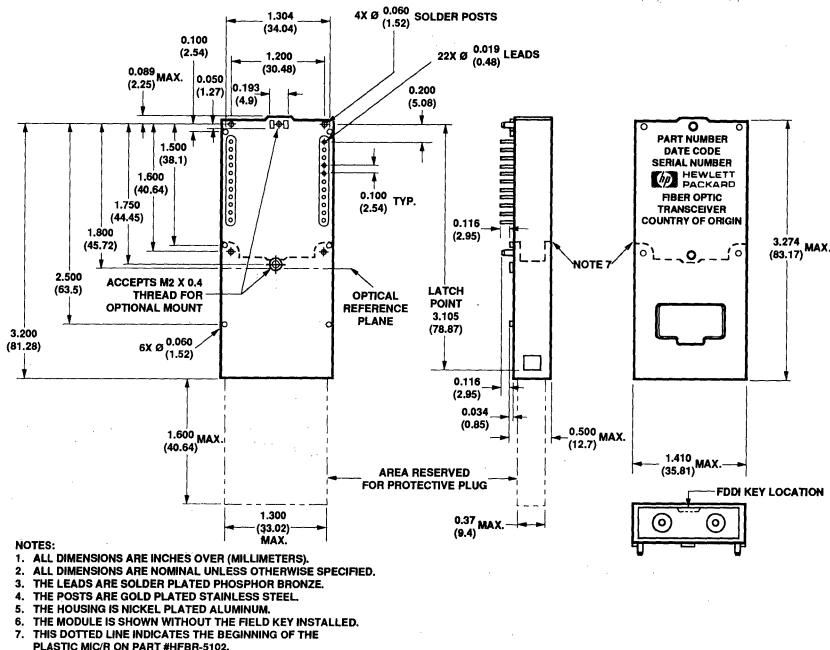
Outline Drawing. HFBR-5101 - Metal MIC/R, HFBR-5102 - Plastic MIC/R
